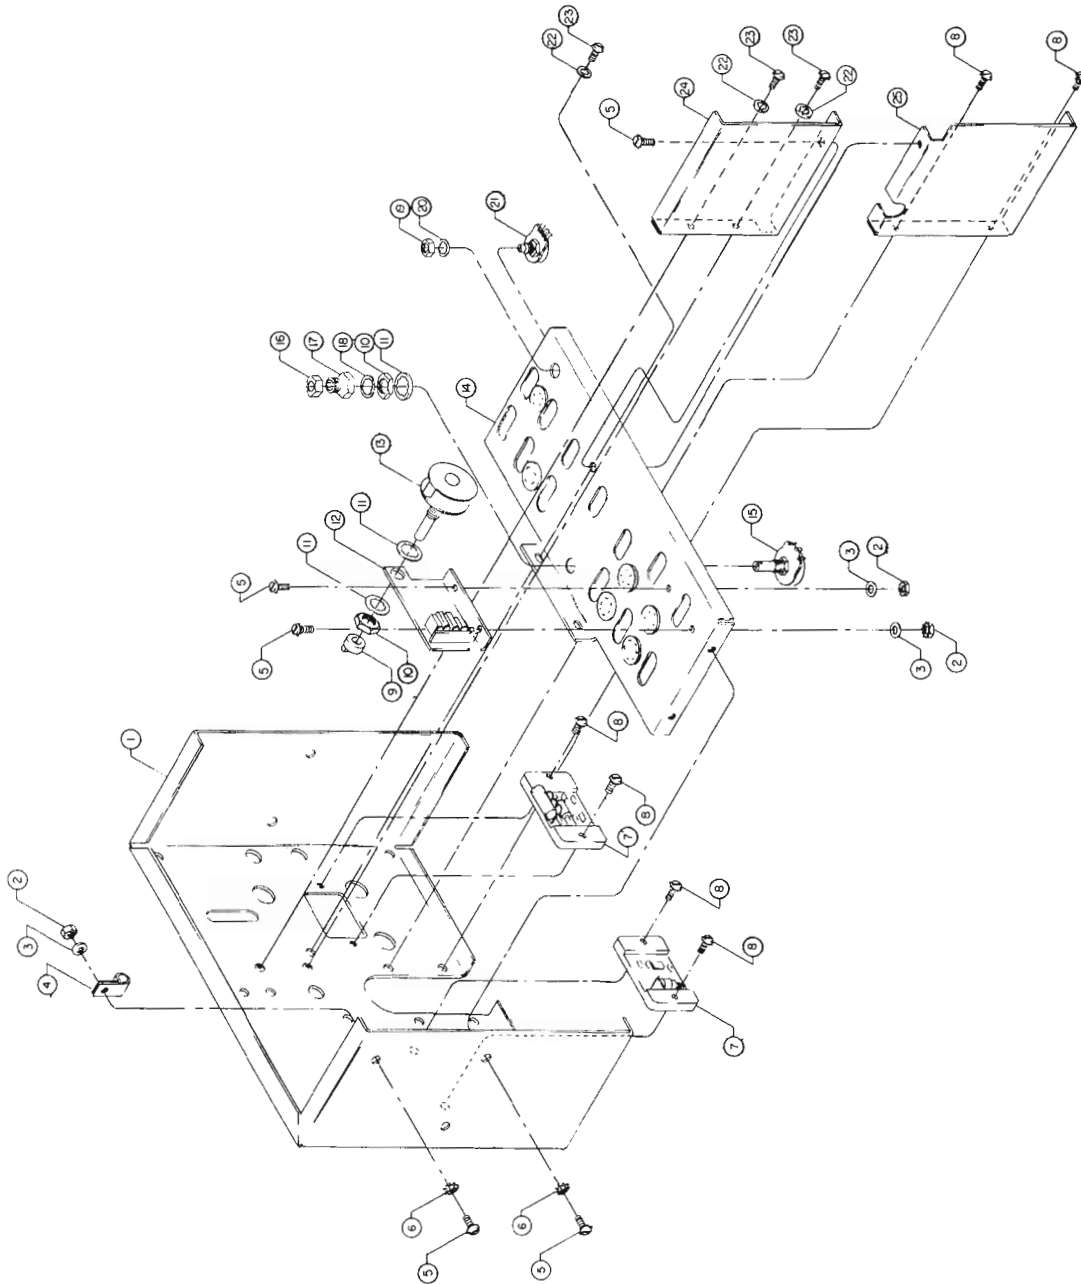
Model High Frequency Signal Generator, Rear Section RF Generator Assembly
